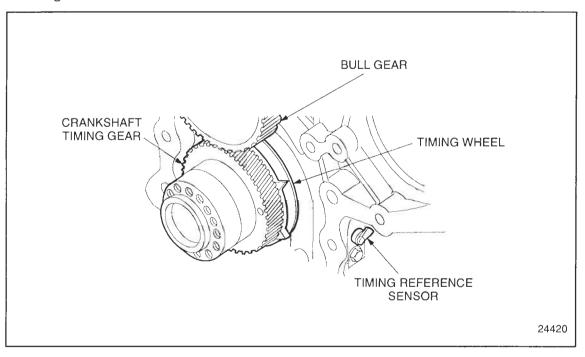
Crankshaft Timing Gear and Related Parts Location
